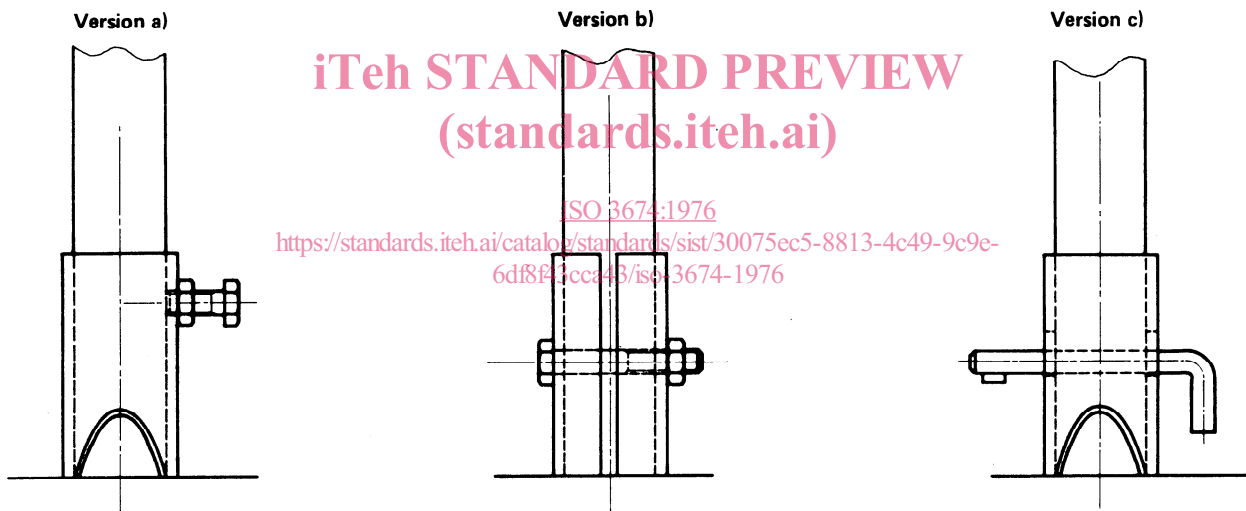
Methods of fixing detachable stanchions in receptacles
